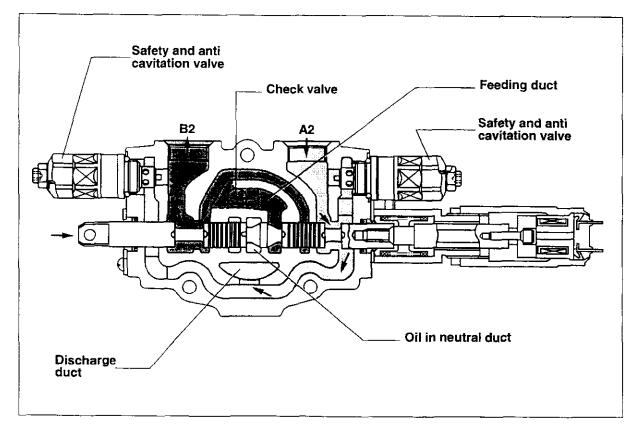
Bucket section in roll-in phase (mechanical control)
